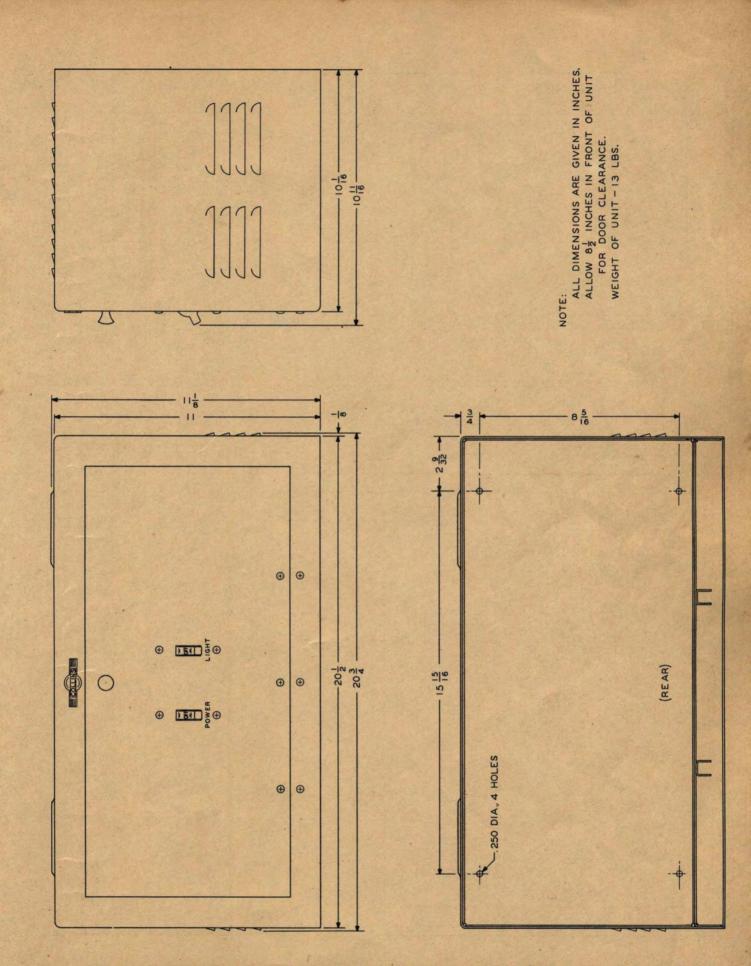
Type 274D-2 Relay Control Unit, Outline and Mounting Dimensions
